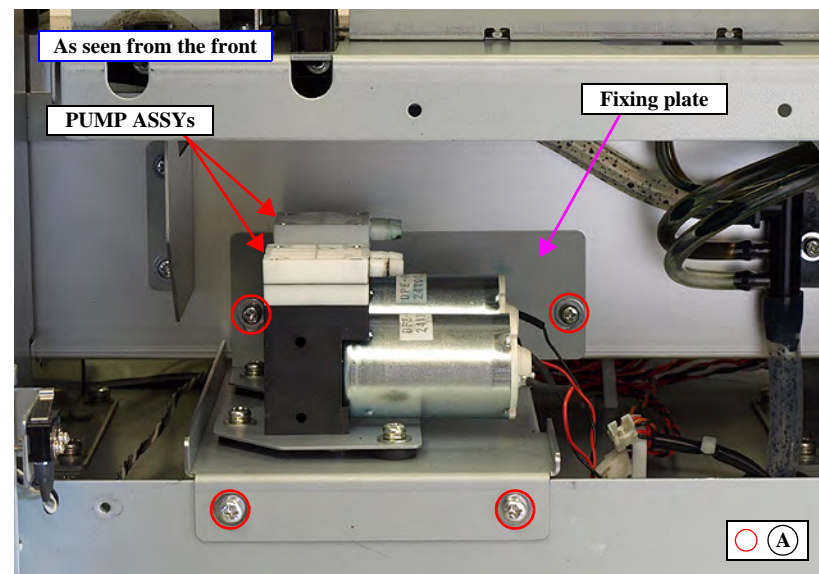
Removing the PUMP ASSYs with the fixing plate
